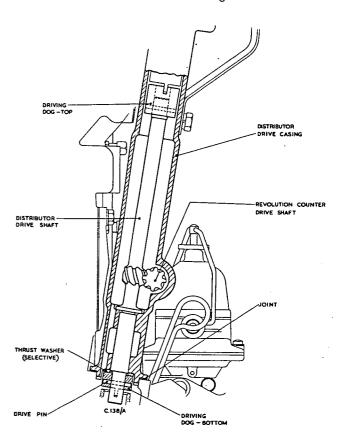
Dismantling and re-assembling the distributor drive casing assembly
